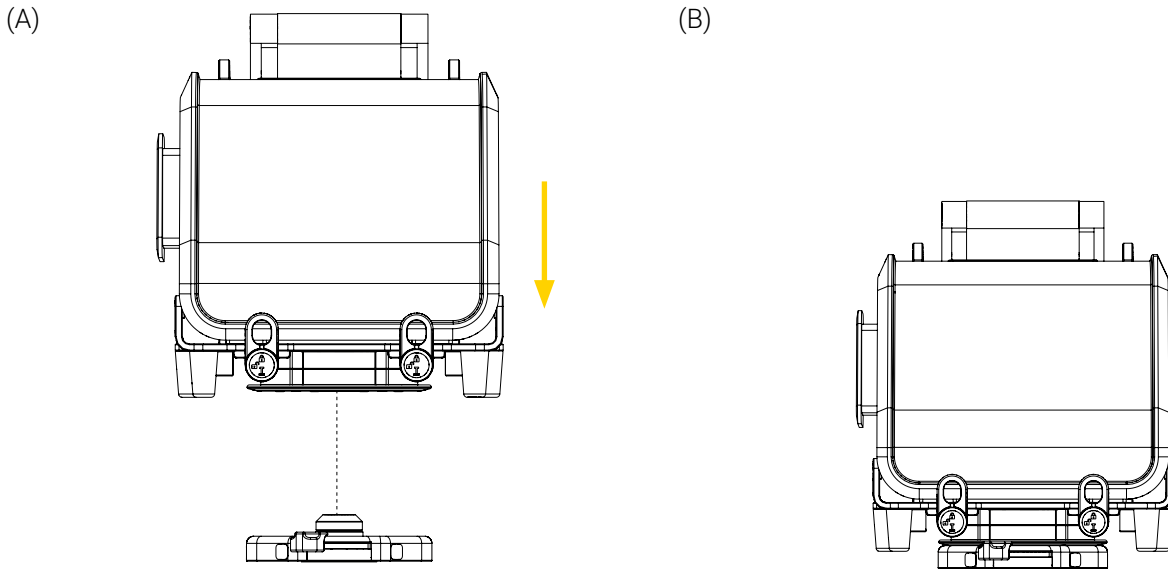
Installing the mounting bracket on the Universal Mounting Base
